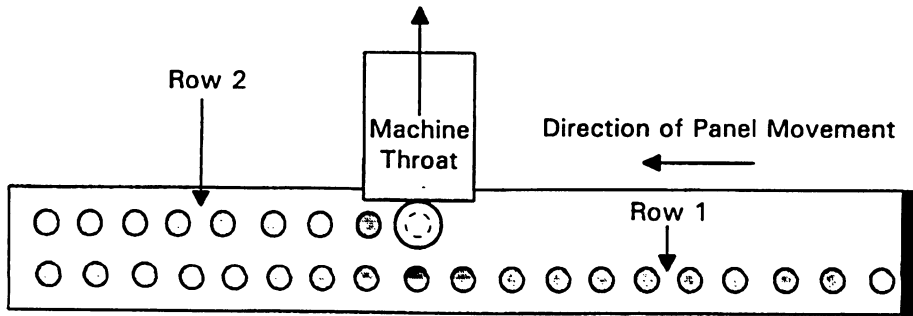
Panel sample orientations with respect to the welding machine throat. ^[48]
